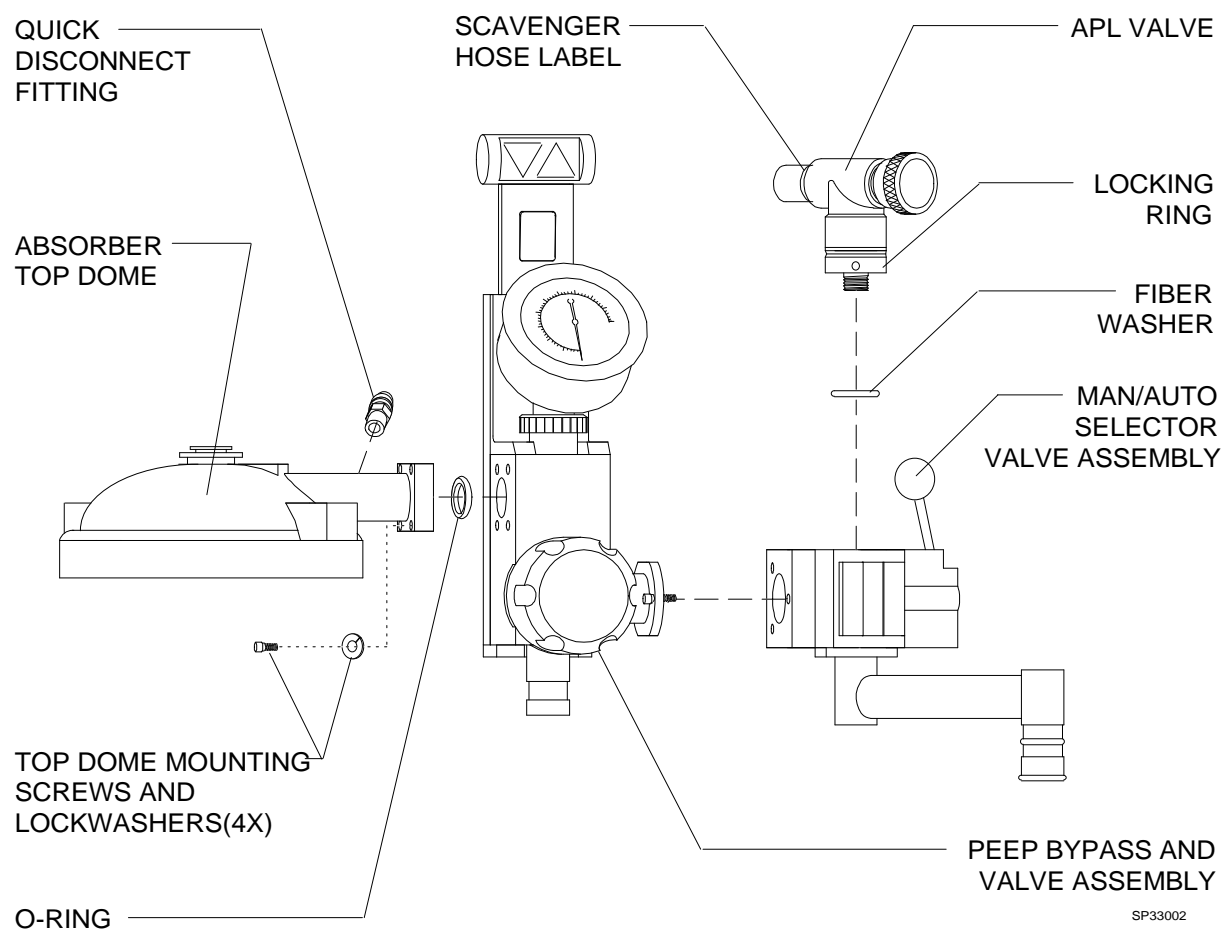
PEEP BYPASS AND VALVE ASSEMBLY
